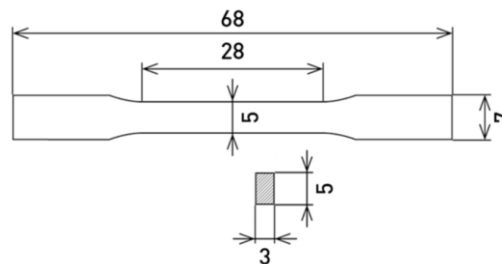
Dimensions of the studied L-PBF-printed specimens¹⁵
